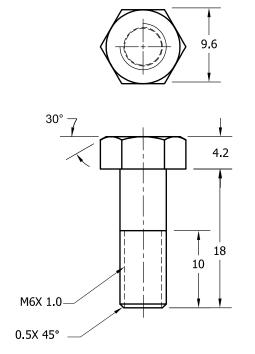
Orthographic views and dimensions of the M6X 1.0 bolt
